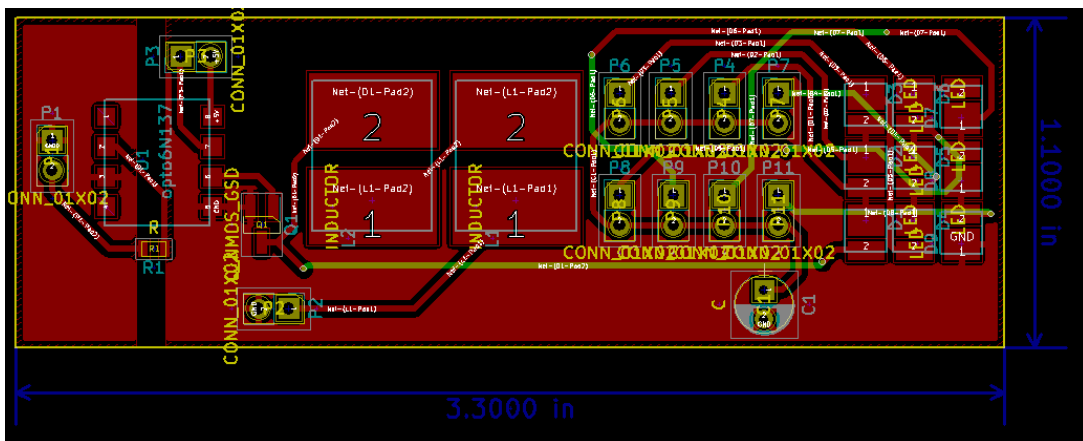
Printed Circuit Board (PCB) Layout of LEBD converter prototype.
